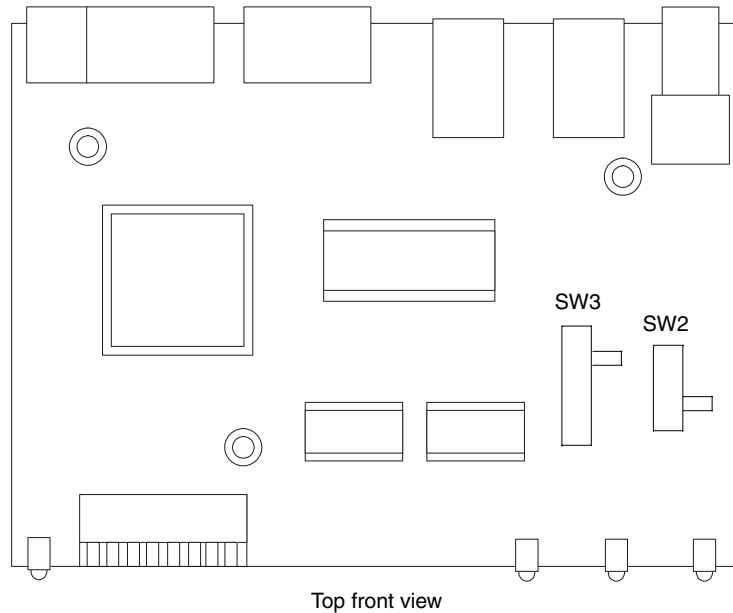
AXR-MSE internal circuit board showing the location of the SW2 and SW3 slide switches
